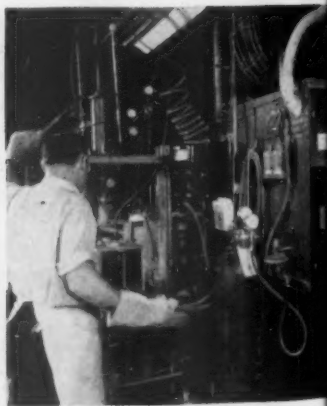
HIGH-FREQUENCY INDUCTION FURNACE FOR MELTING METAL AND LARGE DENTAL PRESSURE CASTING MACHINE.
